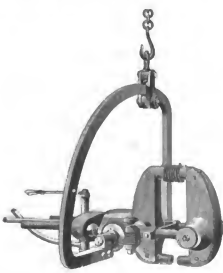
SUSPENDED RIVETING MACHINE SIDE VIEW.
